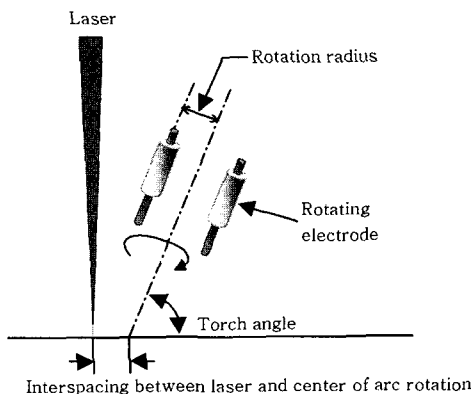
Schematic diagram of laser-rotating arc hybrid welding process
